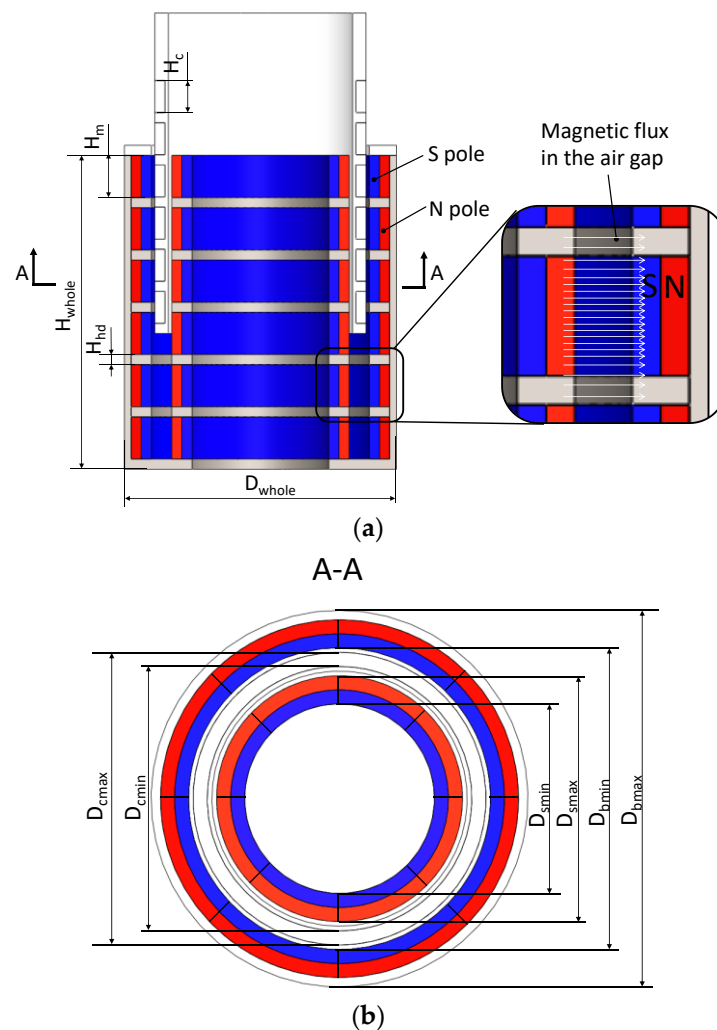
Dimensional drawing. (a) Sectional view in the radial direction. (b) Sectional view in the axial direction.
